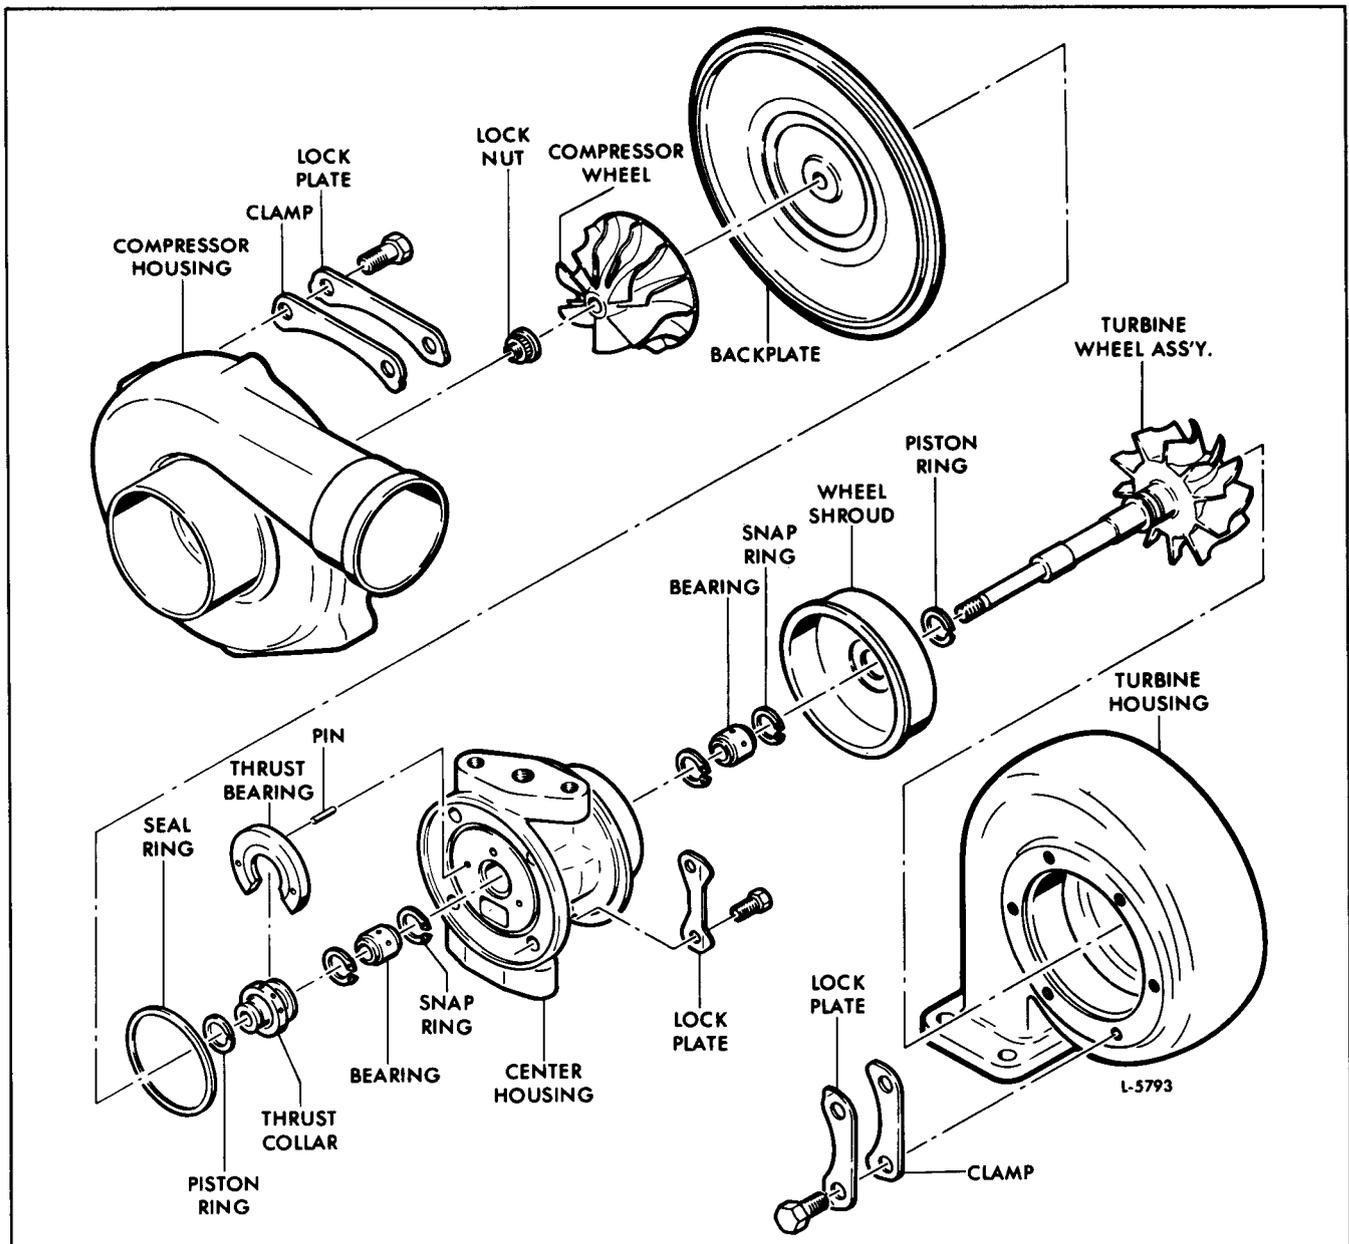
TO4B Turbocharger Details and Relative Location of Parts
